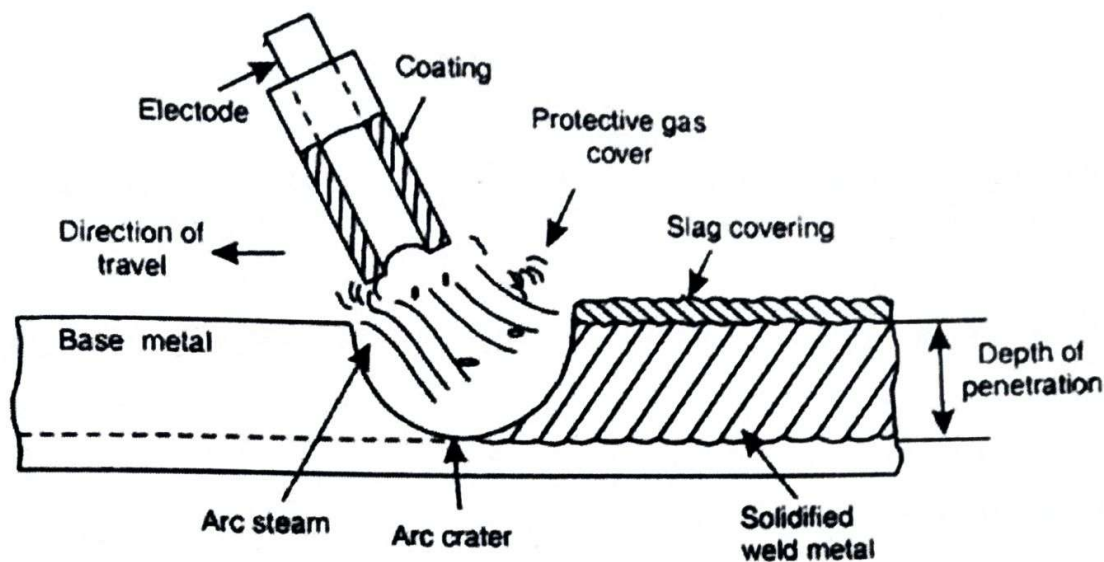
Cut away view of the arc welding with a coated electrode.
